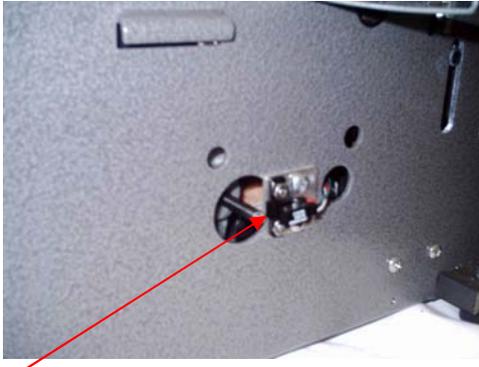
Gearbox/Motor Mount with the Motor Attached
